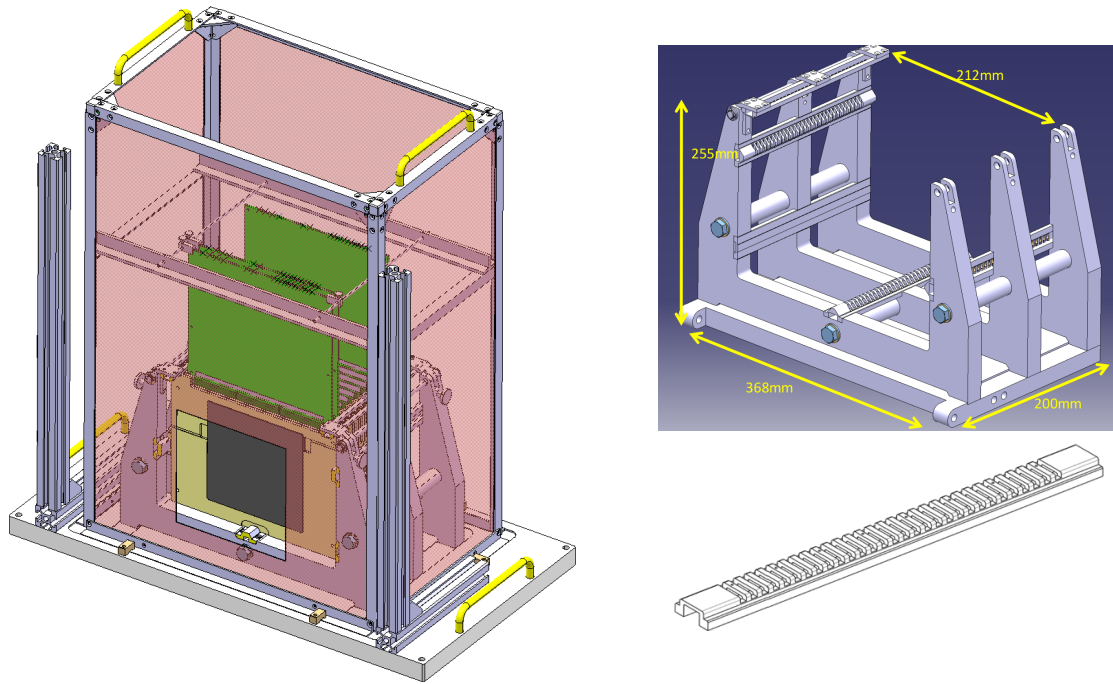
Left-hand side: Scheme of the complete mechanical structure with the tungsten absorbers and readout boards installed. Upper right-hand side: Dimensions of the precision mechanical frame for the positioning of sensor and absorber planes. Lower right-hand side: Detail of the retaining comb jig for positioning of sensor and absorber planes.
